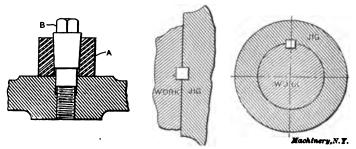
Expansion Bushing used for Locating and Clamping Work
